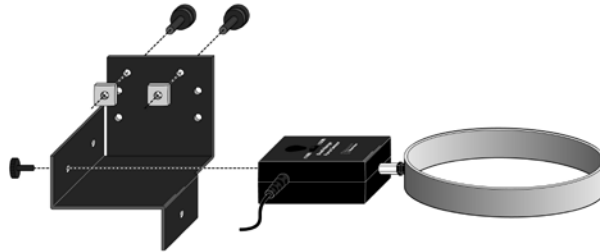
Connect the Dual-Range Force Sensor to the bumper-launcher assembly.
